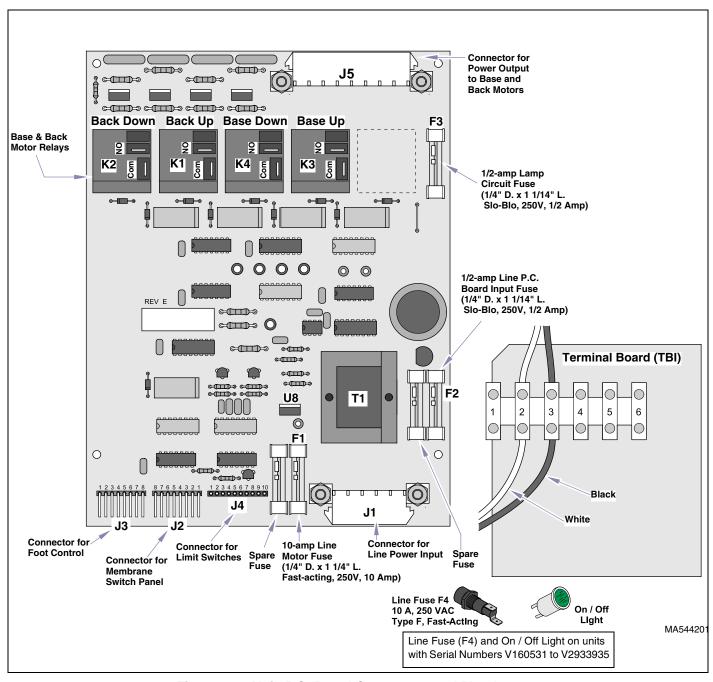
Main P.C. Board Component and Plug Layout From Serial Number V160531 to V456962.
